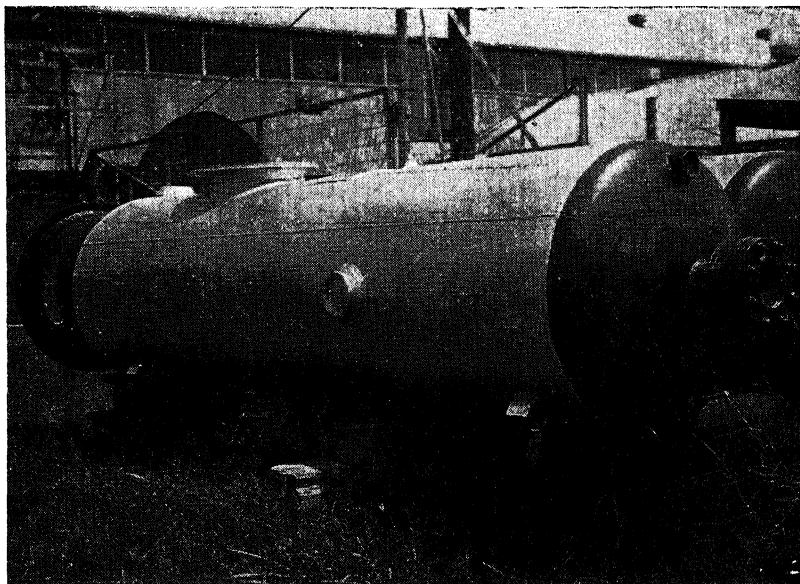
Oil and gas separator welded from high tensile steel. Size: 11 ft. long, 24 in. o.d., $1\frac{1}{8}$ -in. plate. Tested under 3500 lbs. pressure.
